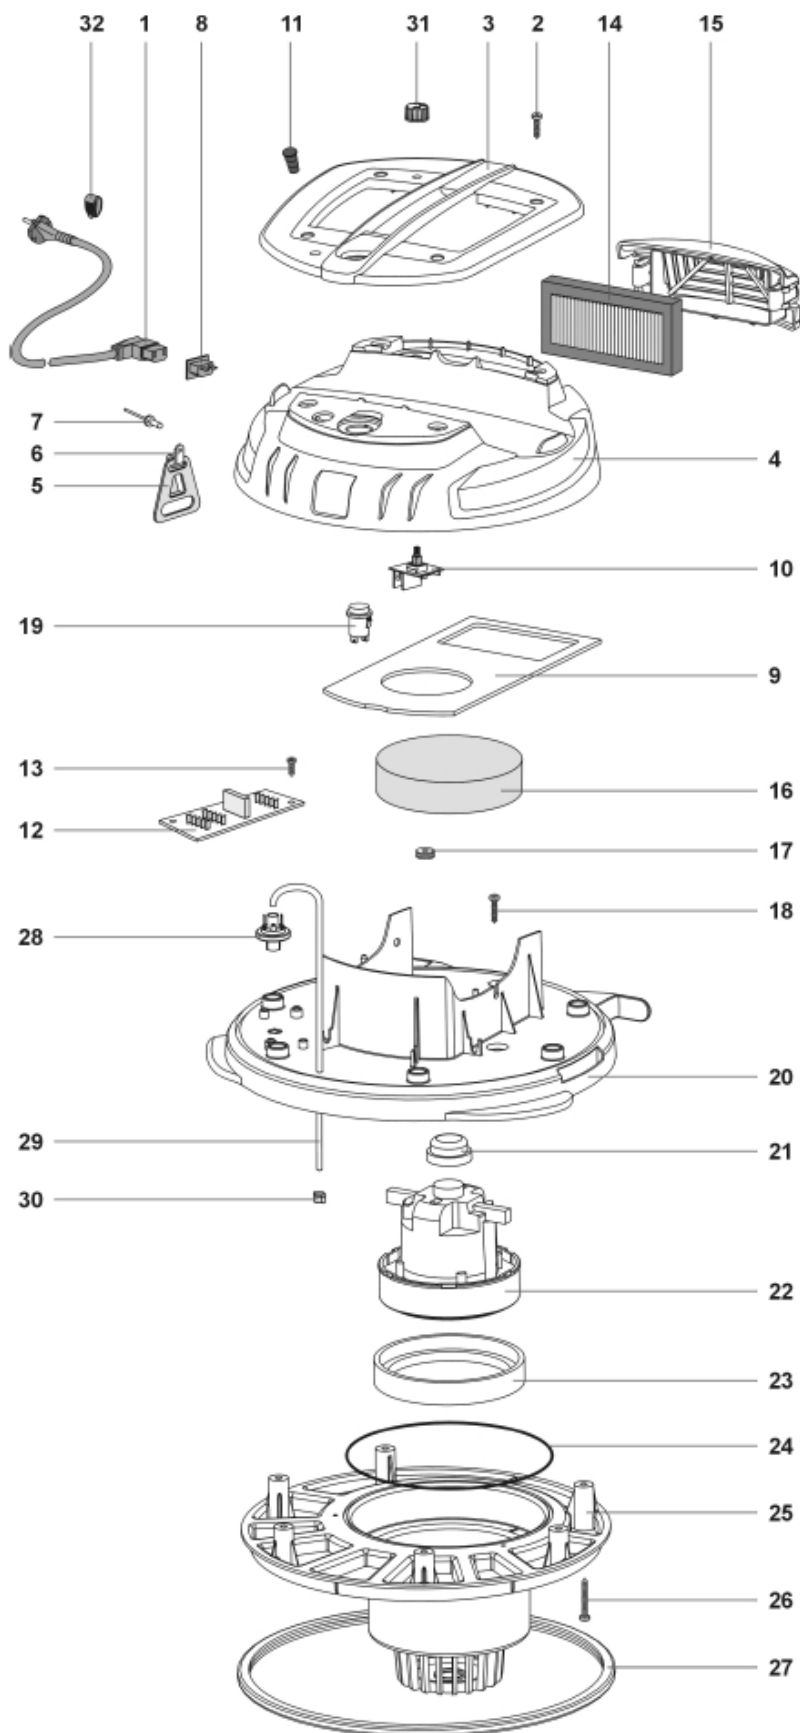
Spare parts drawing 1, head, flexCAT 116 Q
